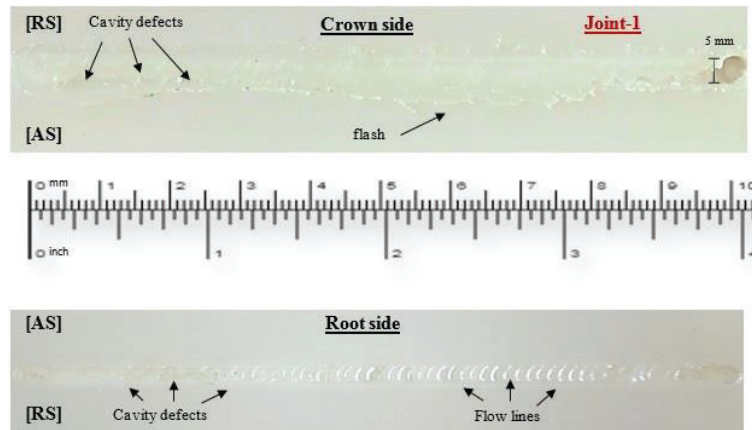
Joint-1 material flow, surface finish, and surface defects
